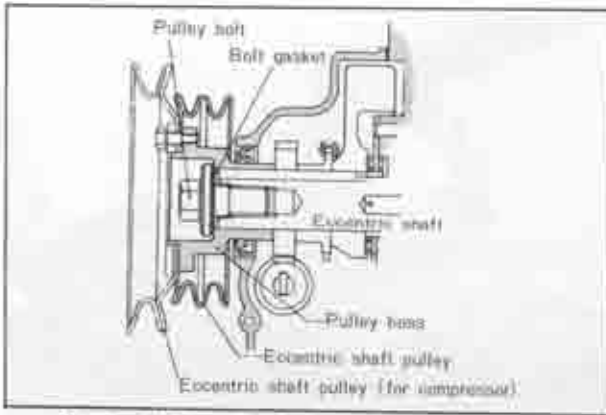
Eccentric shaft pulley and pulley bolt
